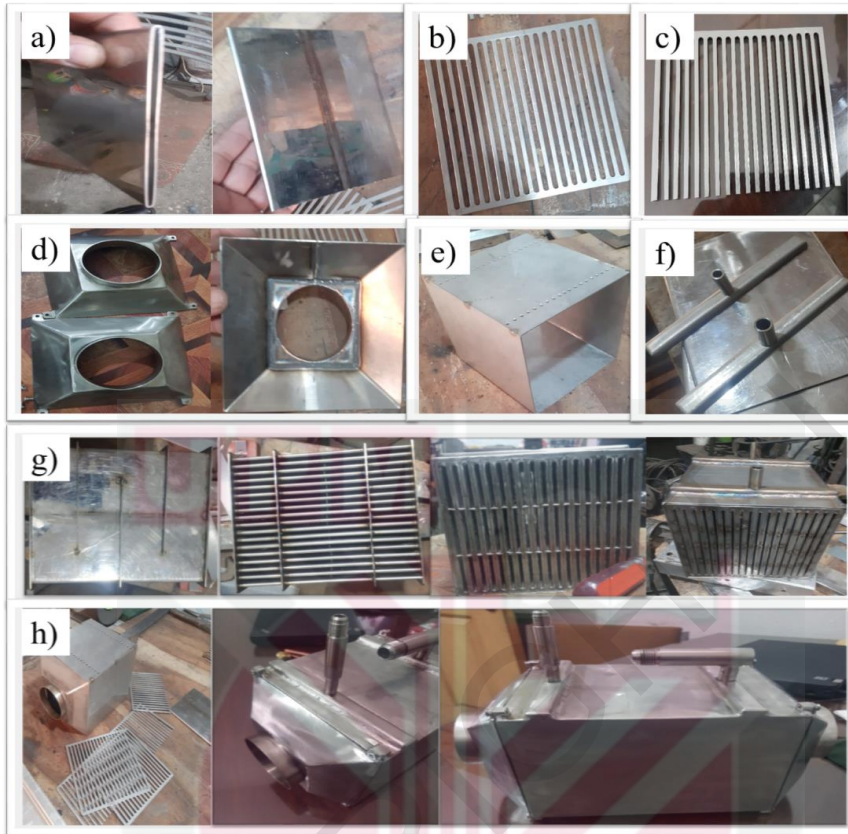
Fabrication of LHE, a) Lamella channel, b) header plate, c) baffle plate, d) fitting covers, e) shell box, f) inlet and outlet of refrigerant, g) fitting and welding of lamellas in header and baffle plates, and h) final product (LHE) alongwith fittings for experimentation
